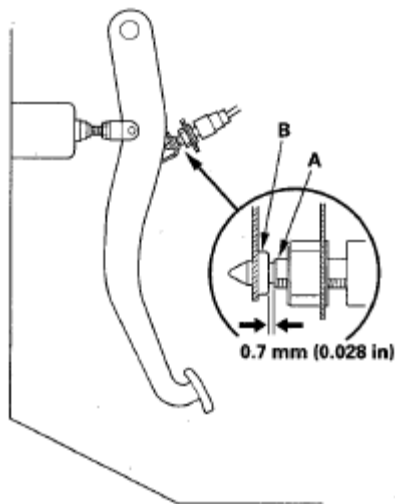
Identifying Brake Pedal Position Switch Clearance
